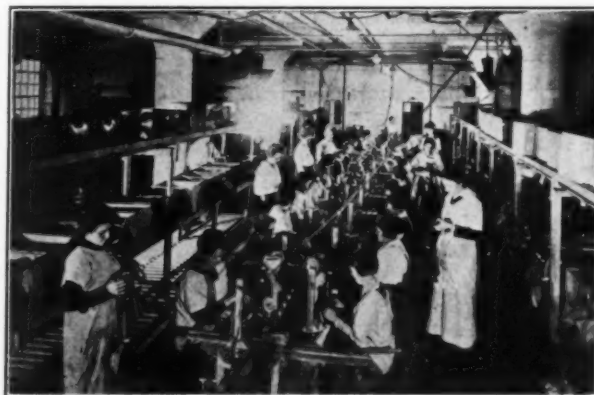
FINAL ASSEMBLY OF R. F. K. TYPE MASKS.
